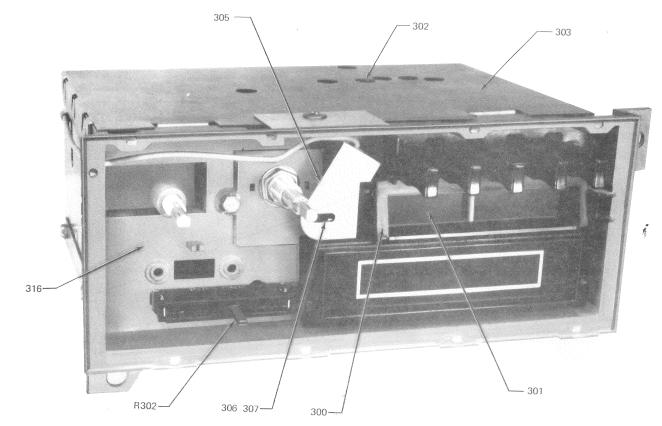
PARTS LOCATION, FRONT VIEW (3501458)
